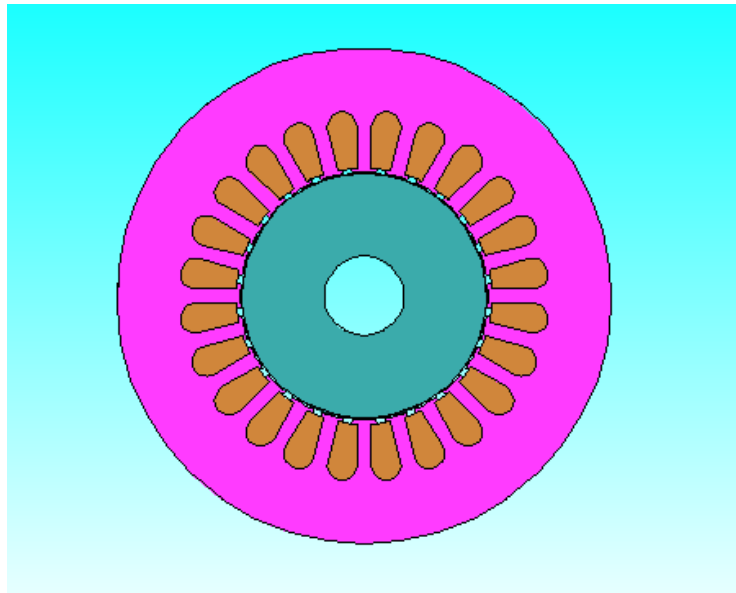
presents the complete geometry of the motor assembly, including the rotor, stator, and windings, as used for defining the reference configuration.
